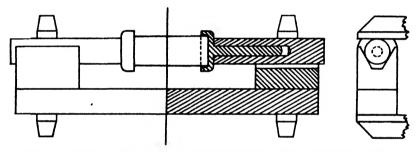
Jig for holding quartz rod and seatings while making the joint
